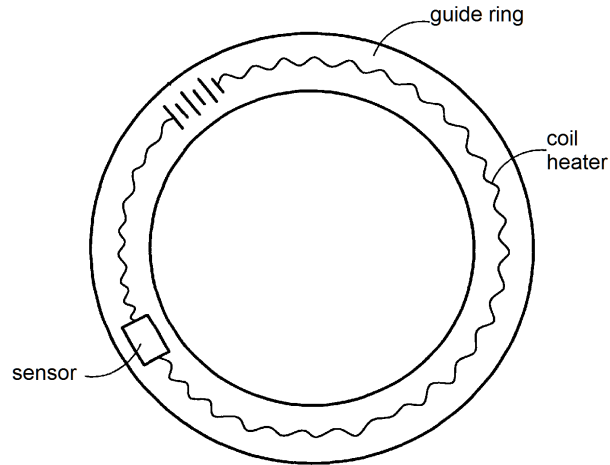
Arrangement of heating coil in the guide ring proposed by Robinson *et al.* [37]
